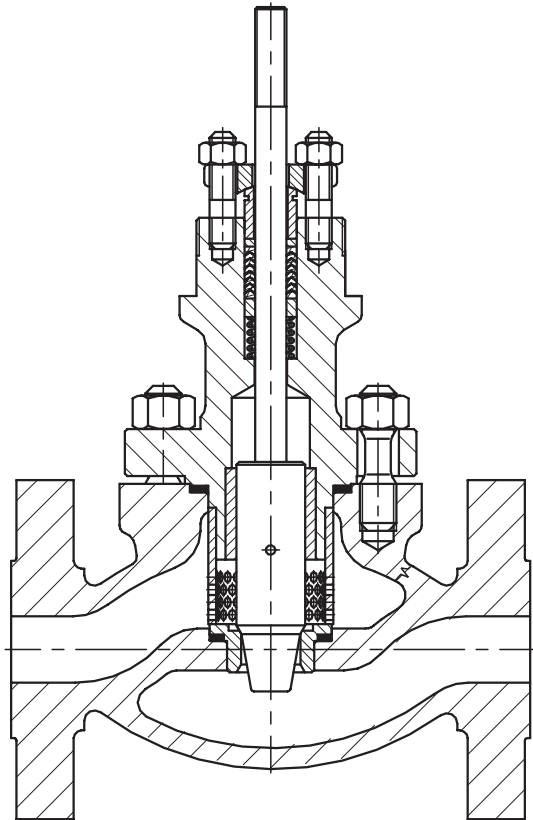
Valve Z1A - contoured valve plug and choke cage
